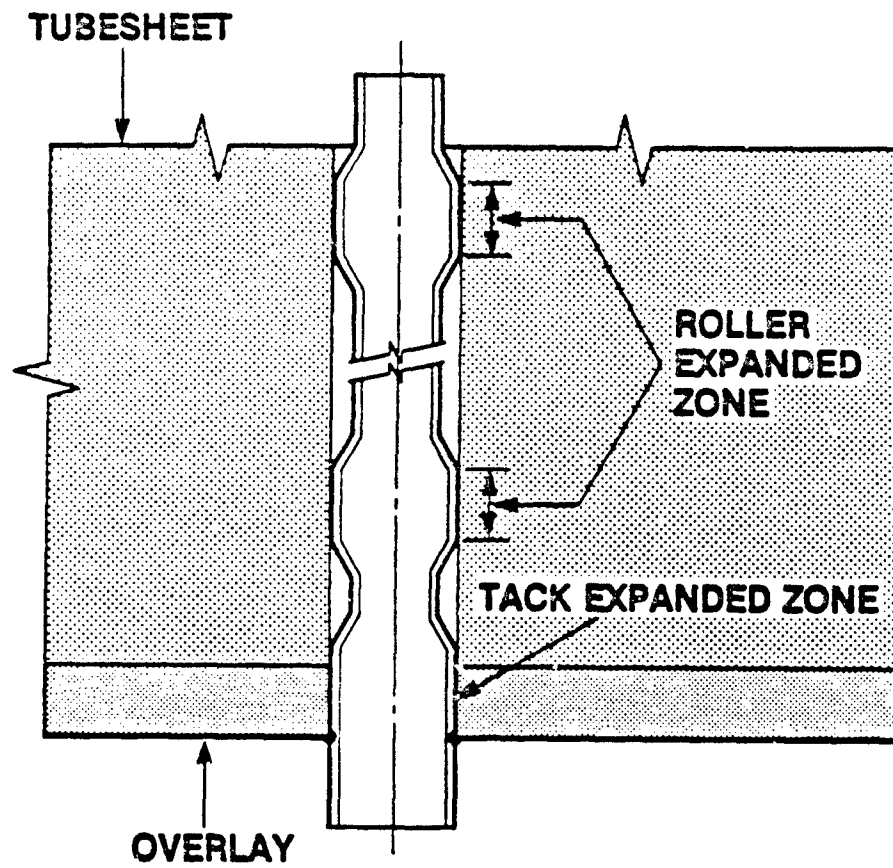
TUBE TO TUBESHEET JOINT DETAILS
